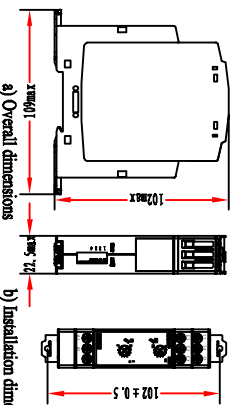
Overall Dimensions and Installation Dimension of NJB1-YW Floatless Relay
